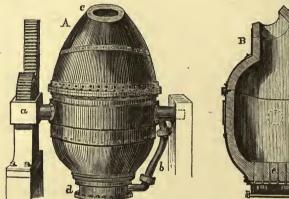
Bessemer Converter. A. Front view, showing the mouth, c; B, Section.
